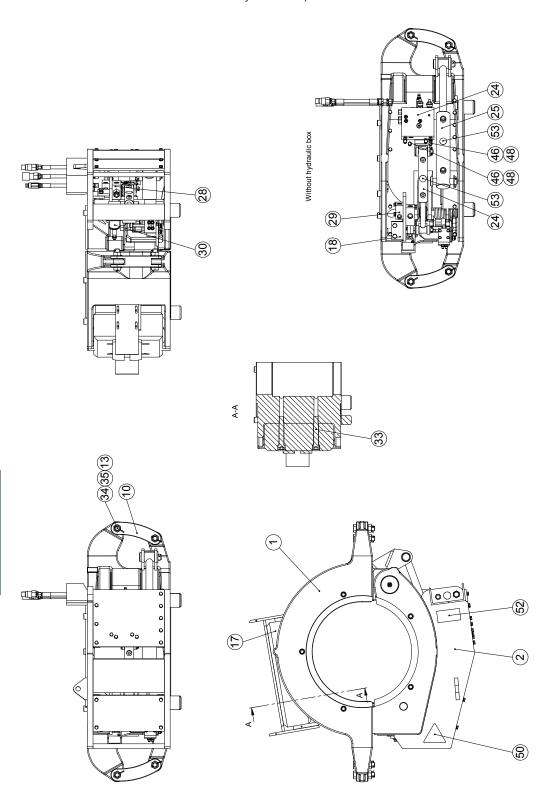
643600-Y-H VES SDS 350/2 Hydraulic operated side door elevator I
